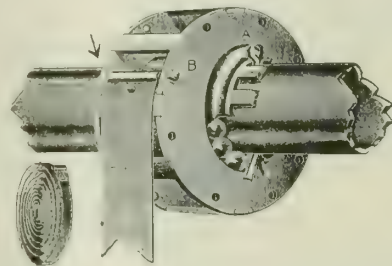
"NE PLUS ULTRA" BALL BEARING FIXTURE
